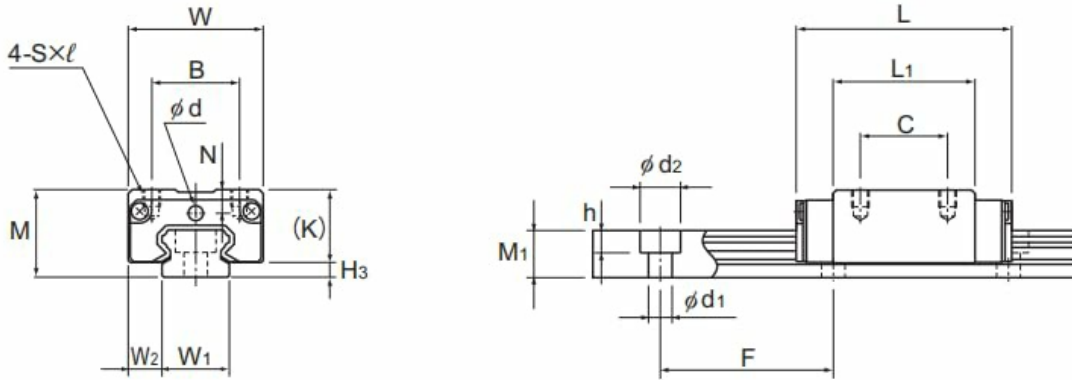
Technical drawing of the HSR10RM linear carriage, showing key dimensions such as length (L), width (W), height (M), and mounting hole specifications.
